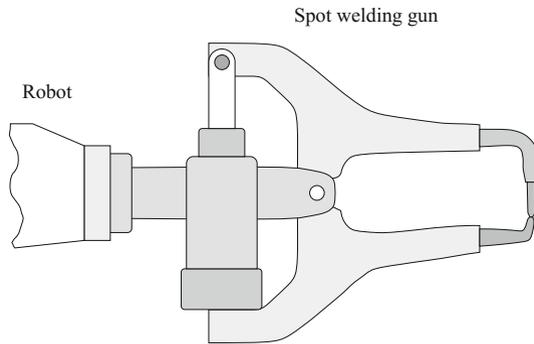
Robot with spot welding gun attached to its end
